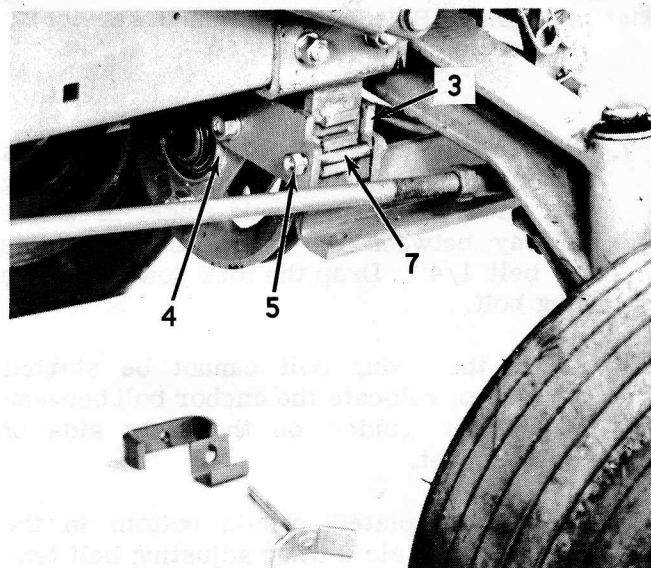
Installing the Pulley, Drive Belt and Bearing Plate Assemblies
